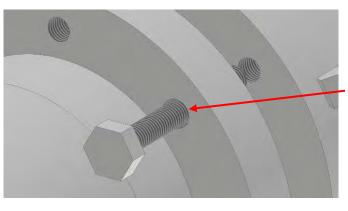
3/4" Bolts Line Up to Back-Out Holes on Fanwheel Hub (BHH)
